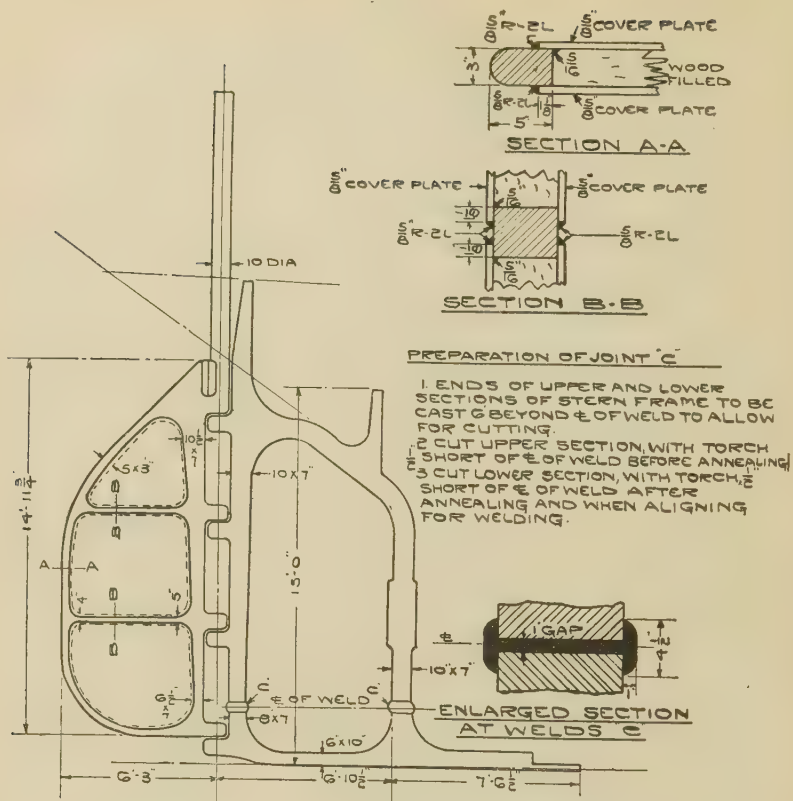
Arc-welded rudder and thermite-welded stern frame of Coast Guard cutter *Northland*.
